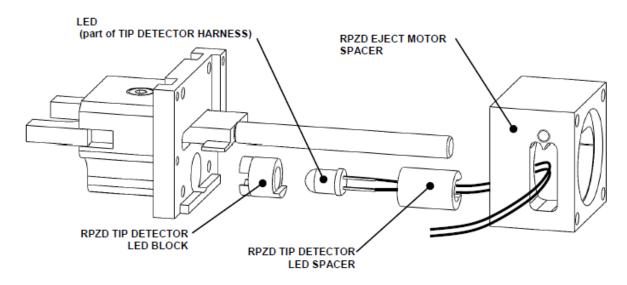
The Reagent Pipettor Z Drive Eject Motor LED
